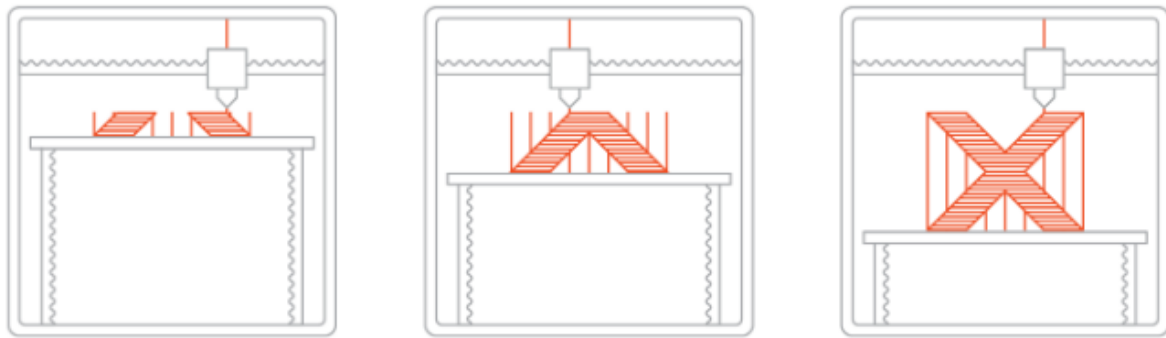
Printing of an X-shaped part using FFF printing. The print bed is lowered as the nozzle continues to deposit material layer by layer [Varotsis, Alkaios B., 2021a]
